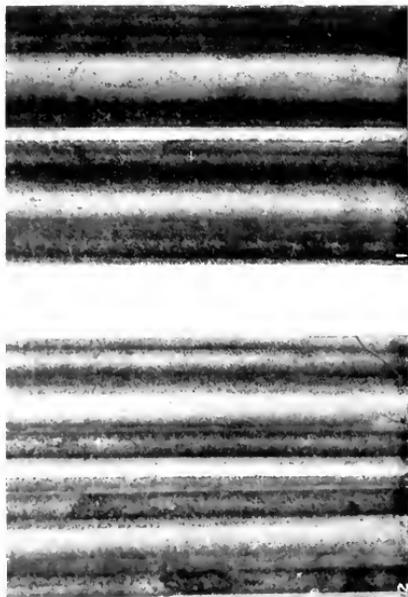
Note the Comparative Appearance of Welds made by Machine (1) and Hand (2)
